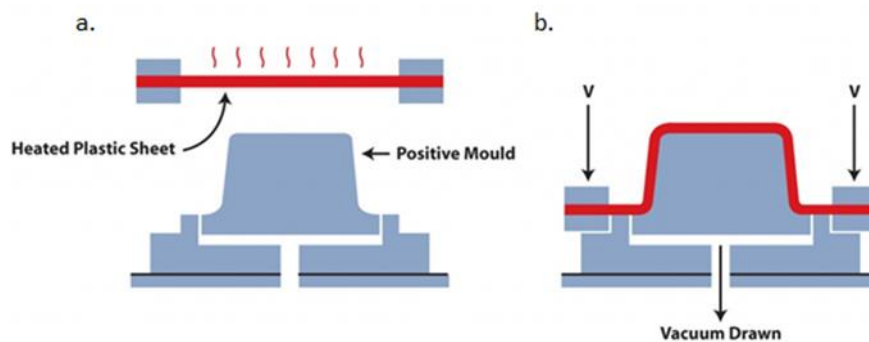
Vacuum forming procedure. a. Heating the flat sheet. b. The space between the softened sheet and the mold is evacuated, forcing the sheet to conform to the shape of the mold. [14].
